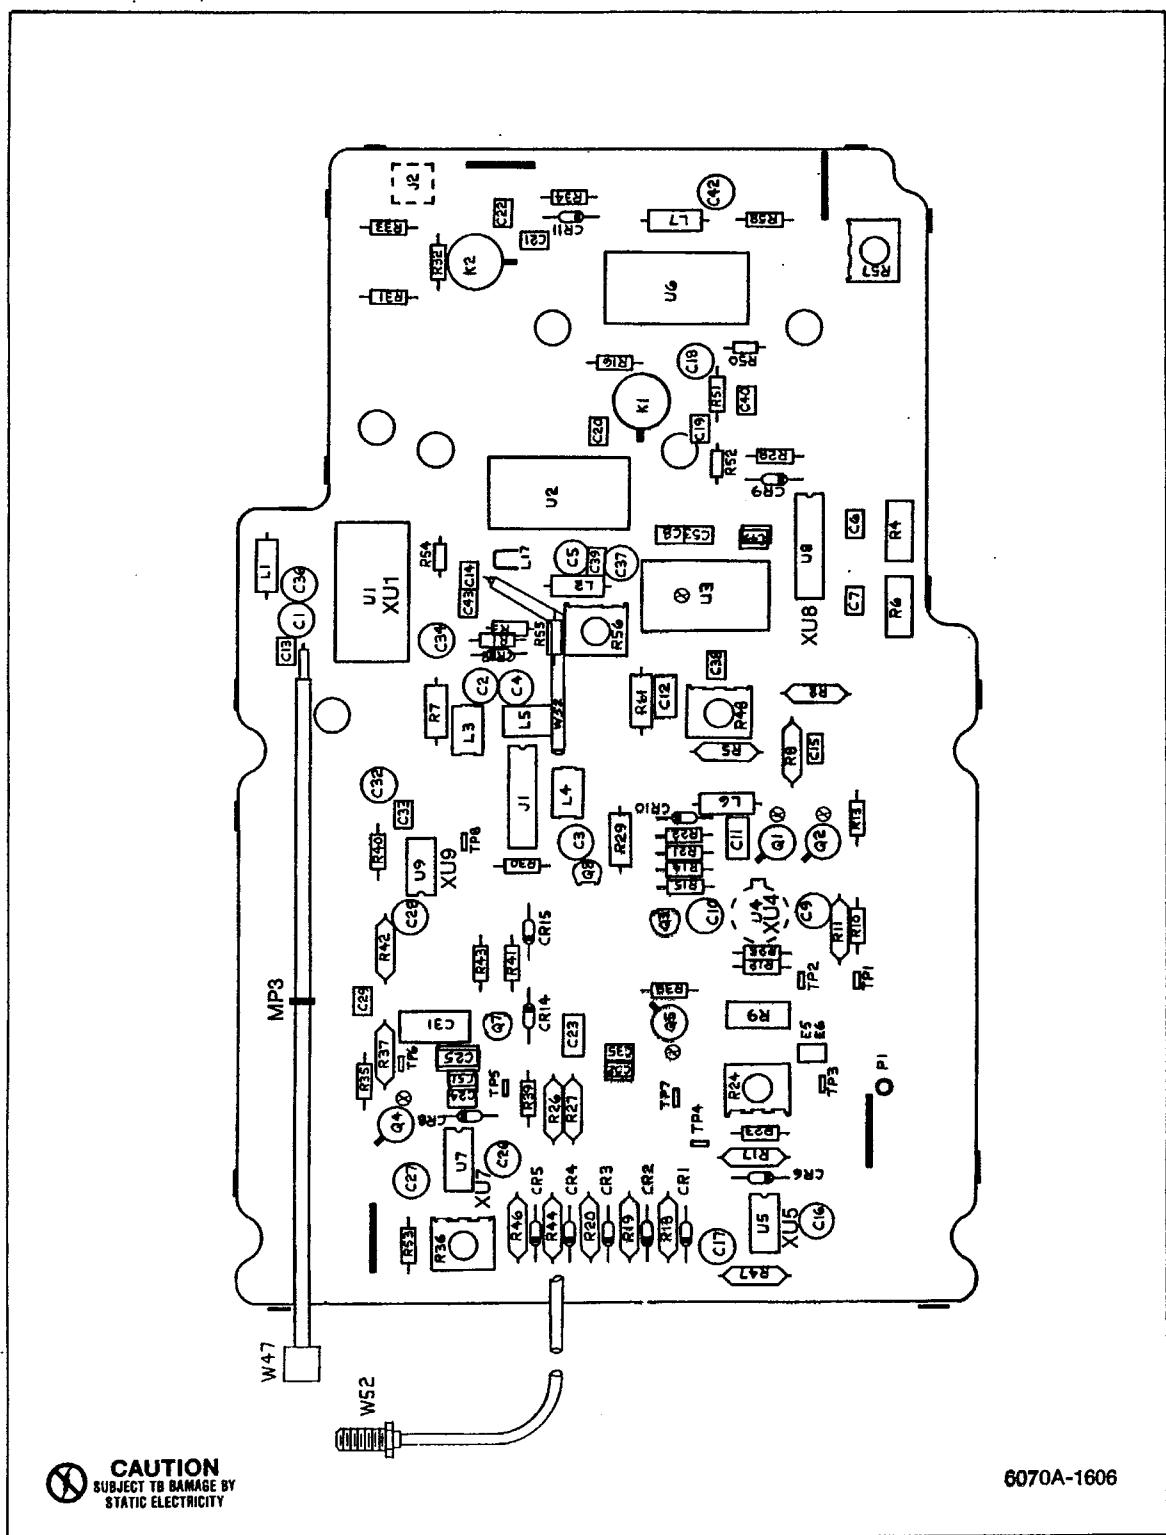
A4A7 Output Amplifier PCB Assembly (6070A)
